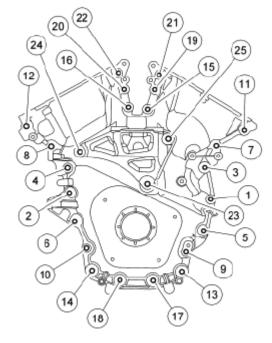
Locating Engine Mount Bracket Bolts Courtesy of FORD MOTOR CO.
